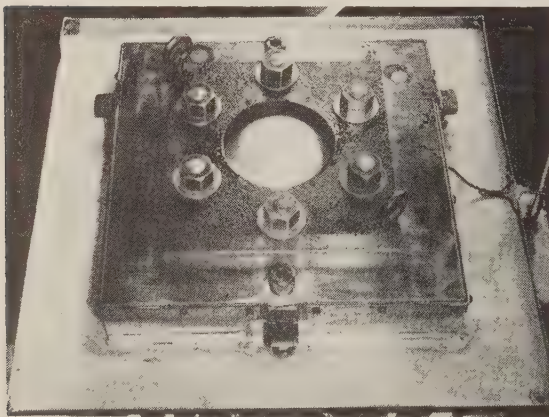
HEAD FOR HOT HYDRAULIC CIRCULAR BULGING WITH SPECIMEN IN PLACE
